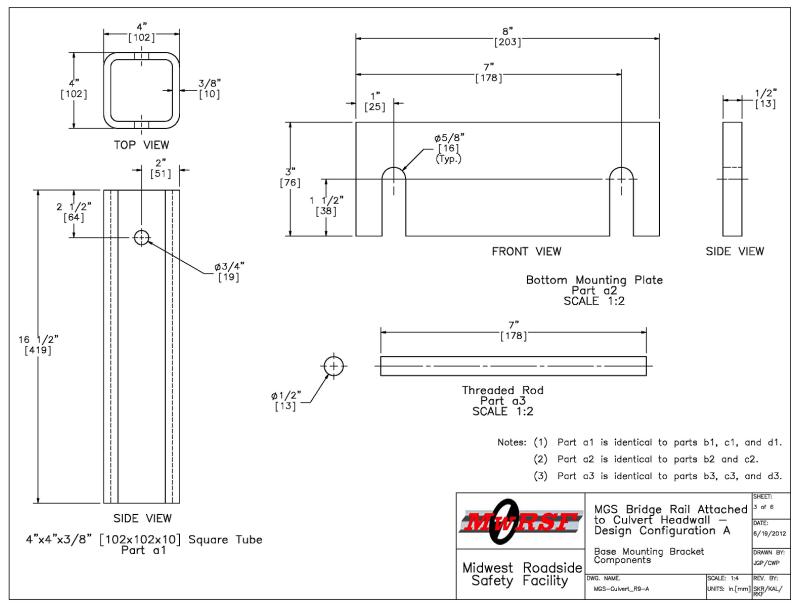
Design Concept A, Tube and Bottom Mounting Plate Details
